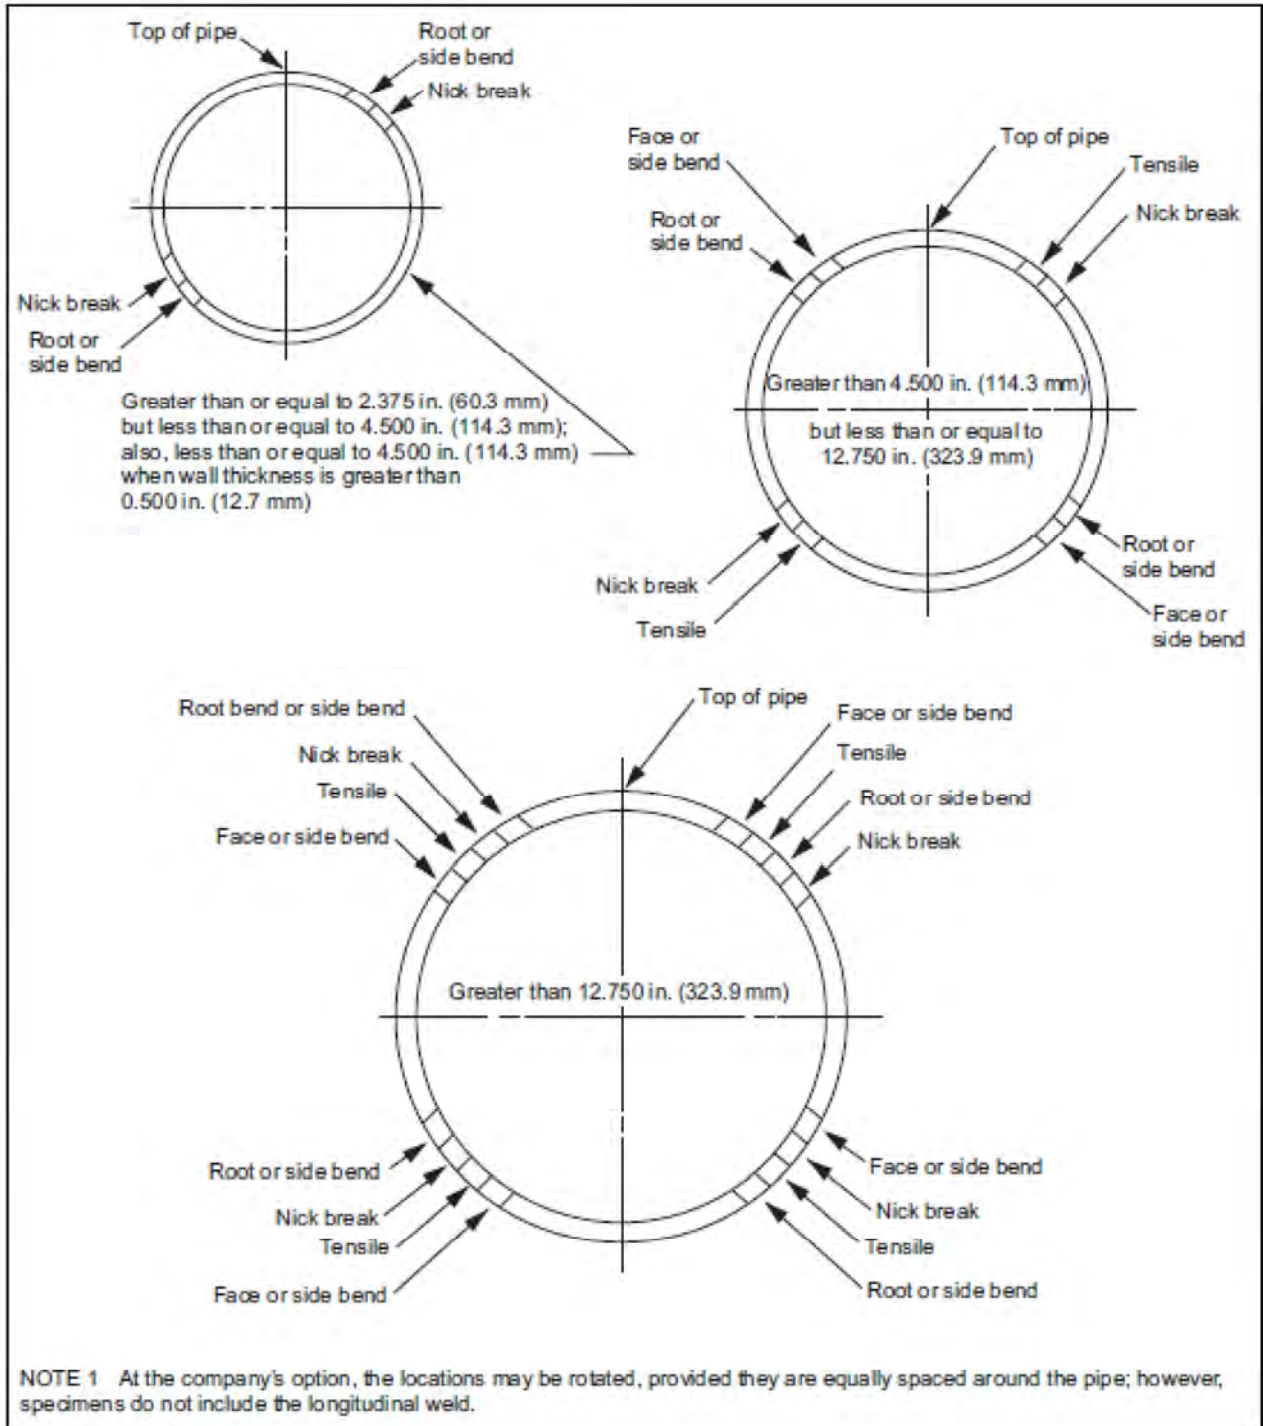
Location of Butt Welding Procedure Qualification Test Specimens
